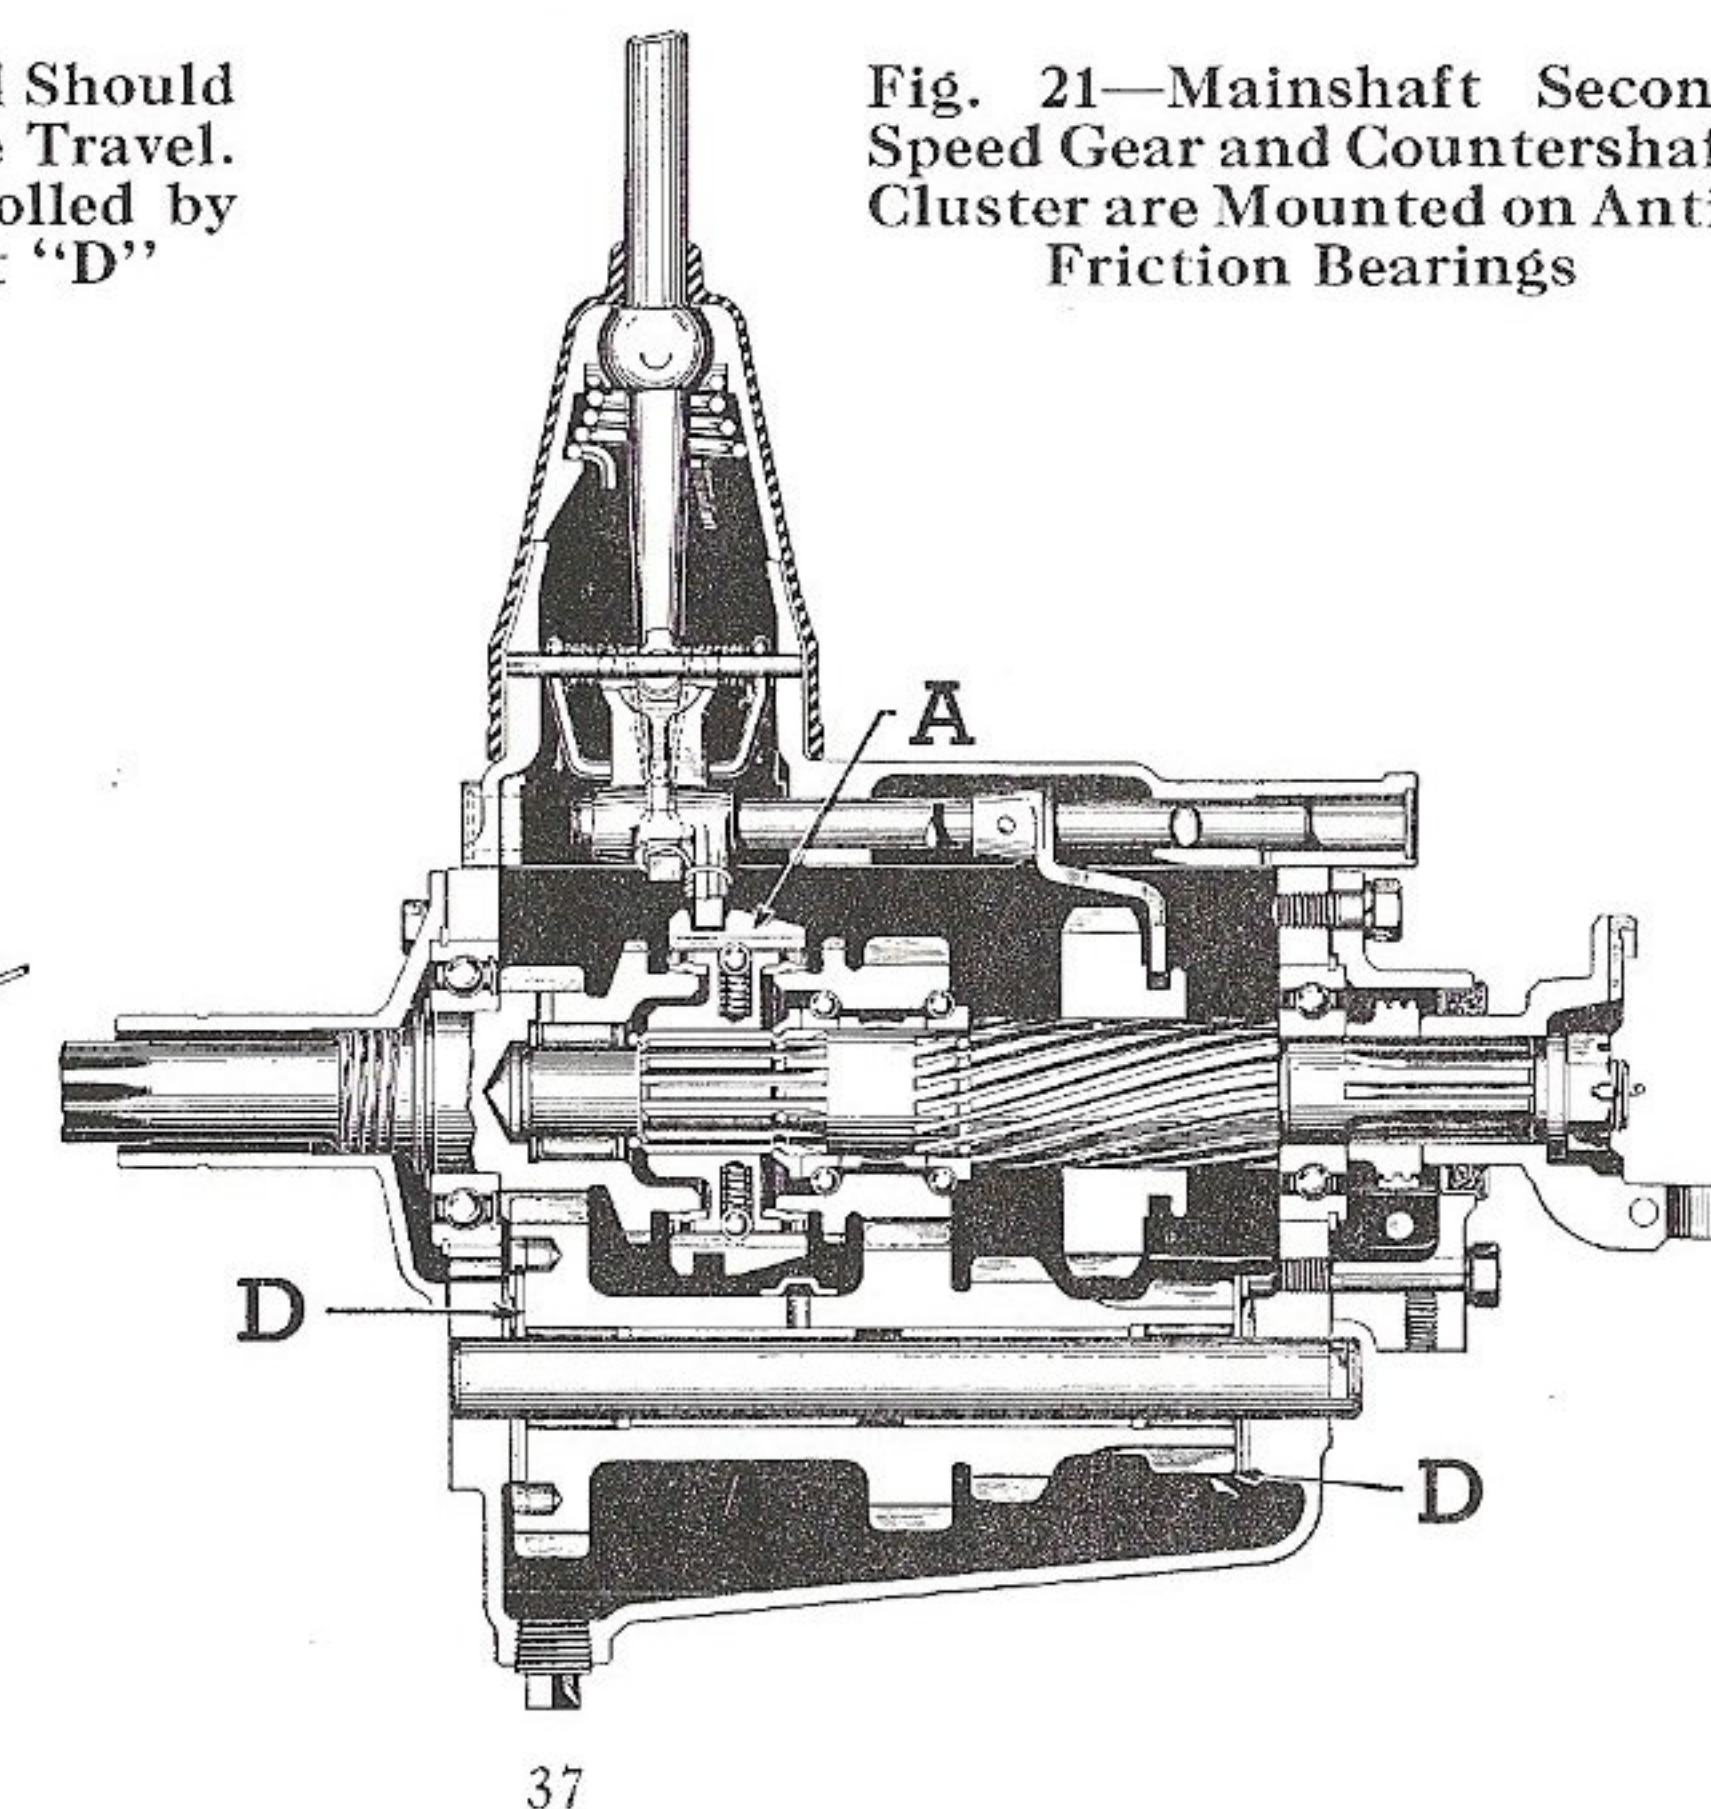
Mainshaft Second Speed Gear and Countershaft Cluster are Mounted on Anti-Friction Bearings
